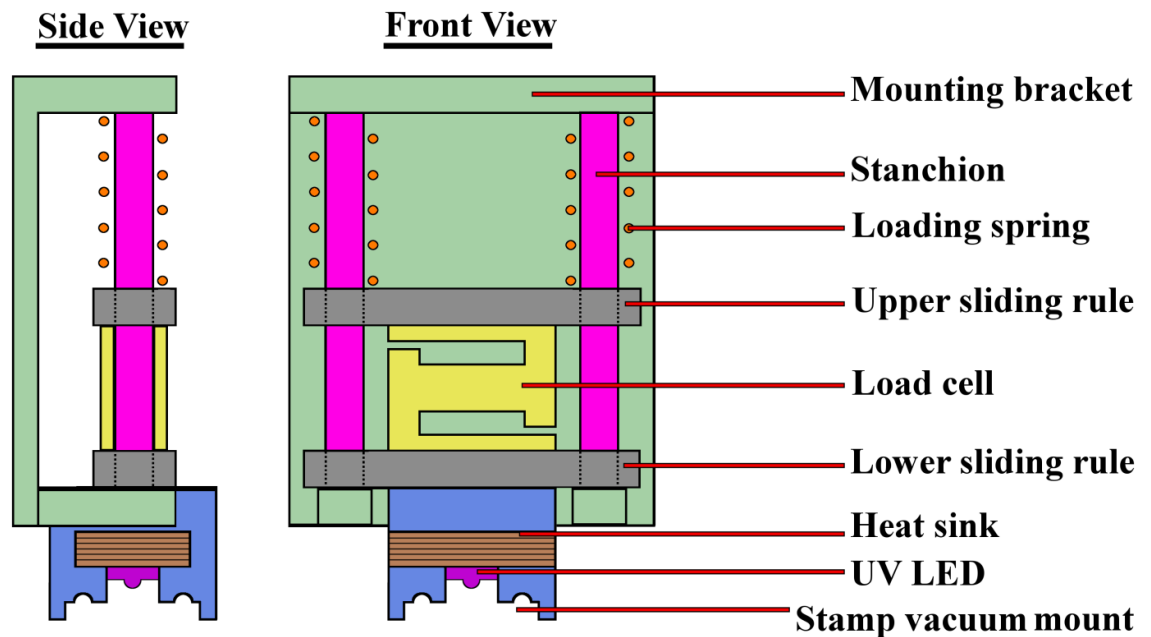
Cross-section schematic of the custom built mount and imprinter head for attaching onto a CNC X-Y-Z head plate.
